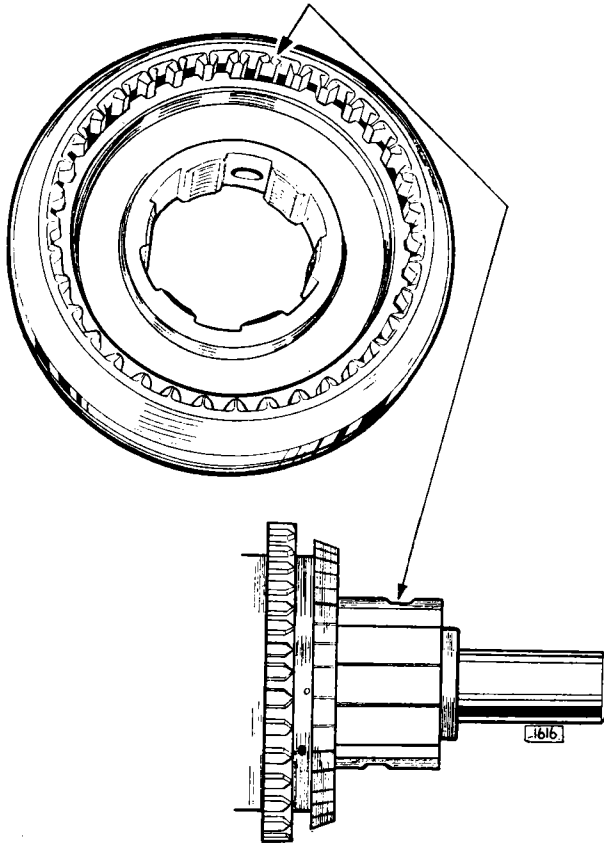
The relieved tooth at the wide chamfer end of the outer operating sleeve must be in line with the foremost groove in the mainshaft.
